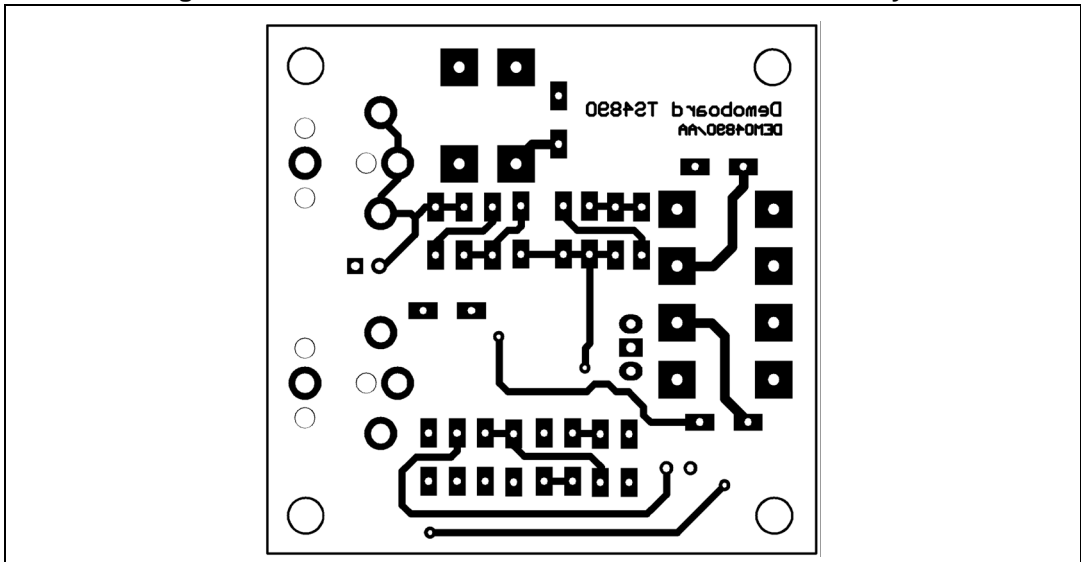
SO8 and MiniSO8 demoboard bottom solder layer
